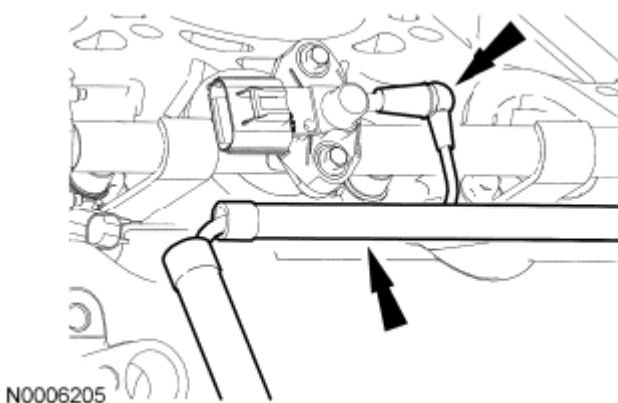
Locating Fuel Pressure And Temperature Sensor Vacuum Hose Fittings
